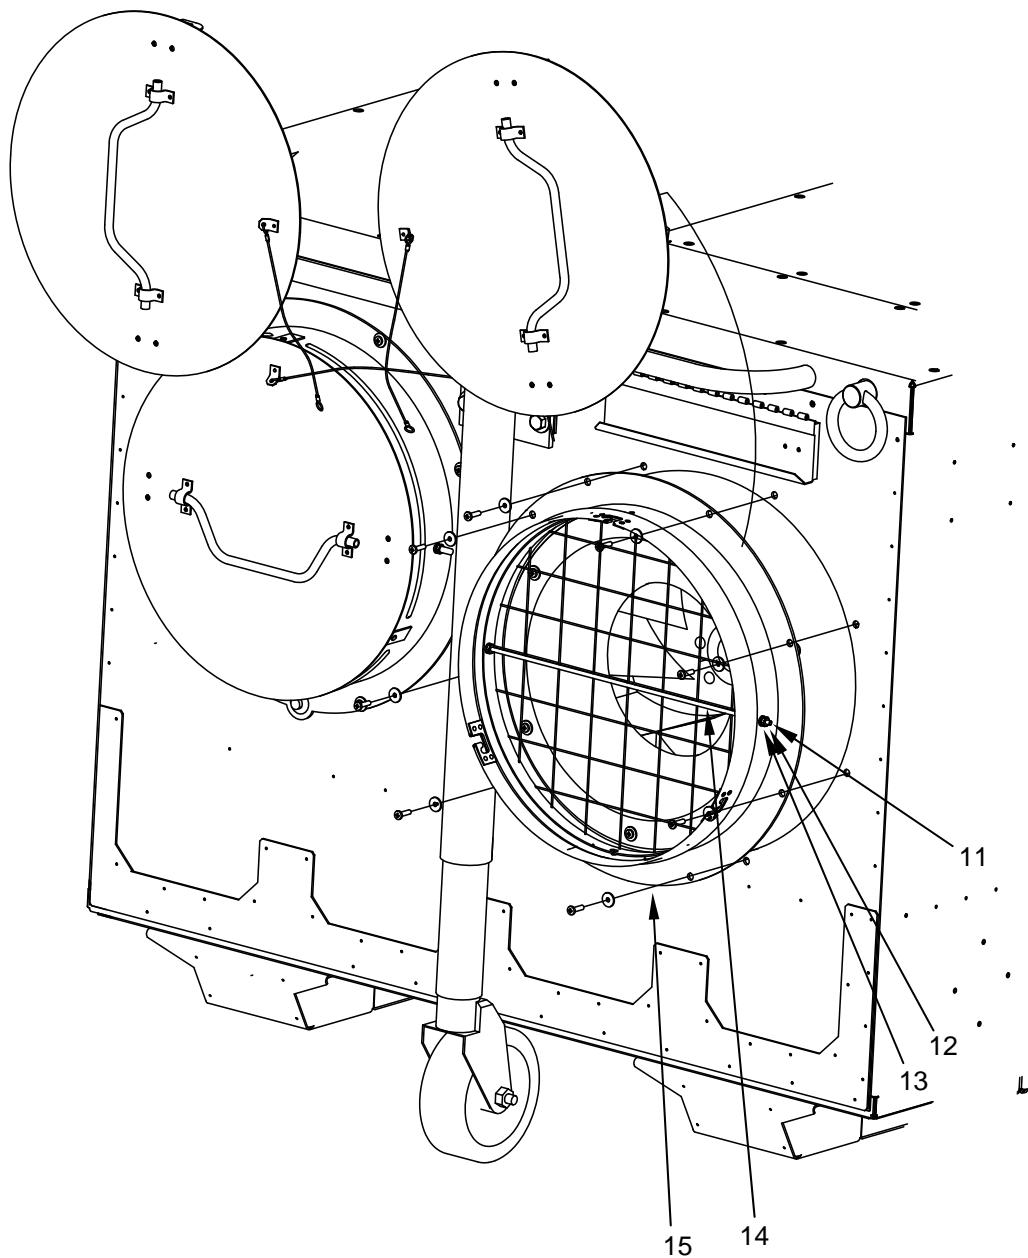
Assembly, Inlet Fan (Sheet 3 of 3).
